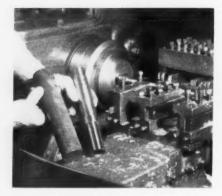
This cone gear sleeve is machined on the No. 12 hydraulic lathe in a floor-to-floor time of 1.6 minutes.
